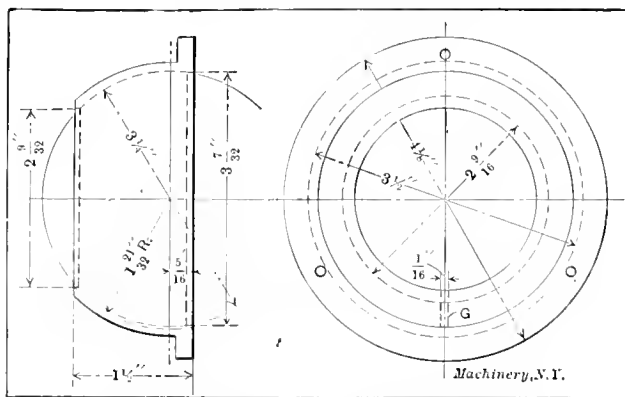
Casting which is held in the Fixture, Fig. 5, while a Groove is being milled in its Spherical Surface
